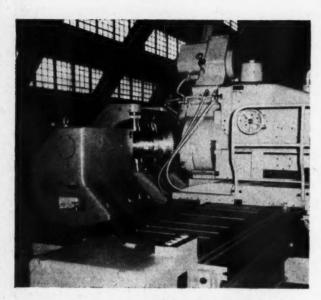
Close-up view from the rear of the Schiess hobbing machine, showing the hobbing head and saddle
